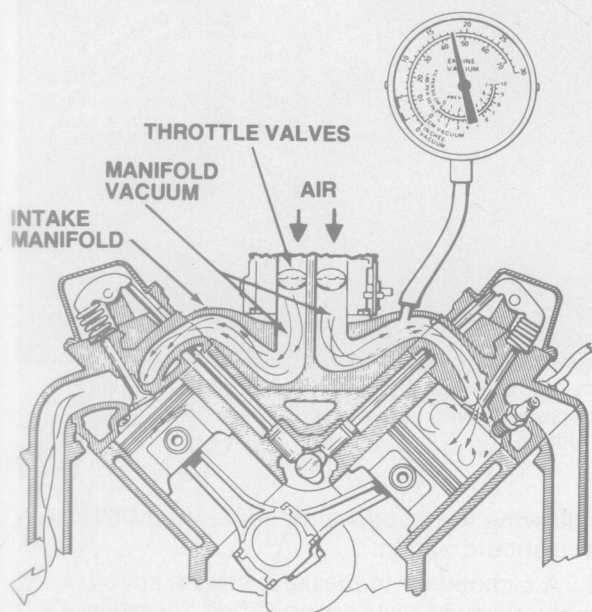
The vacuum gauge is connected to a tap on the intake manifold to measure manifold vacuum.
